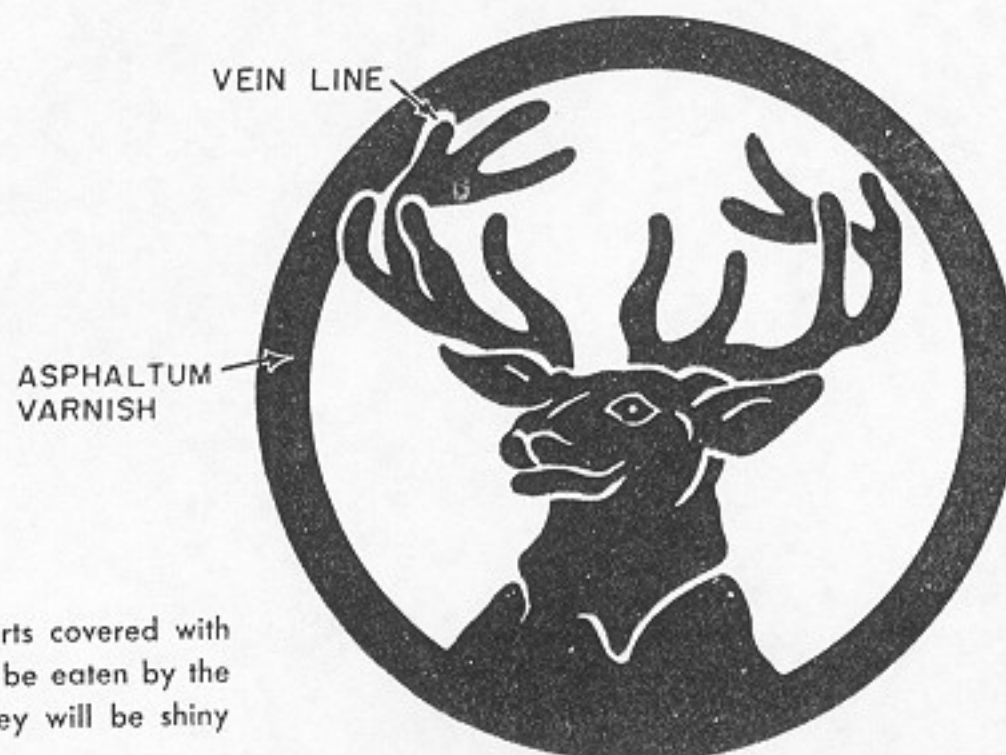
The parts covered with asphaltum will not be eaten by the acid; therefore, they will be shiny after etching.
